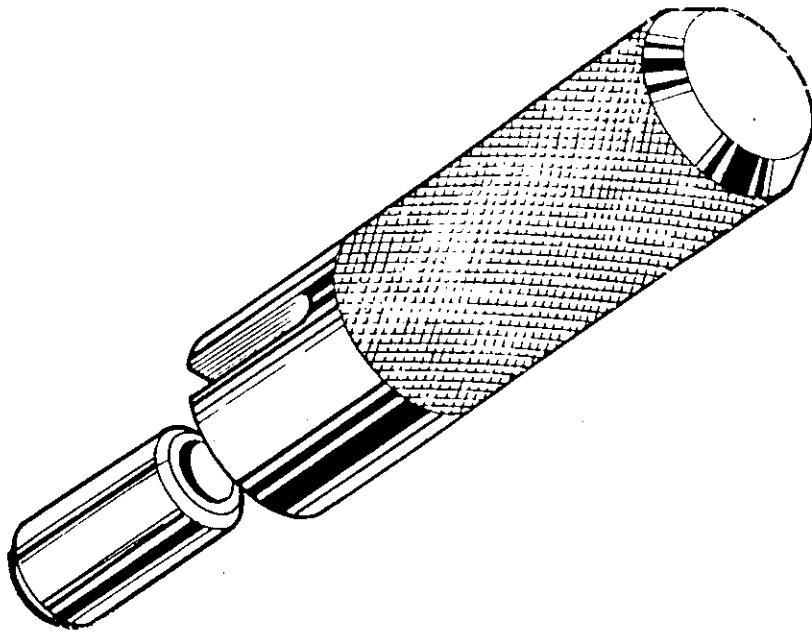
Timing-side crankshaft pinion drift and guide No. 61-6024.
